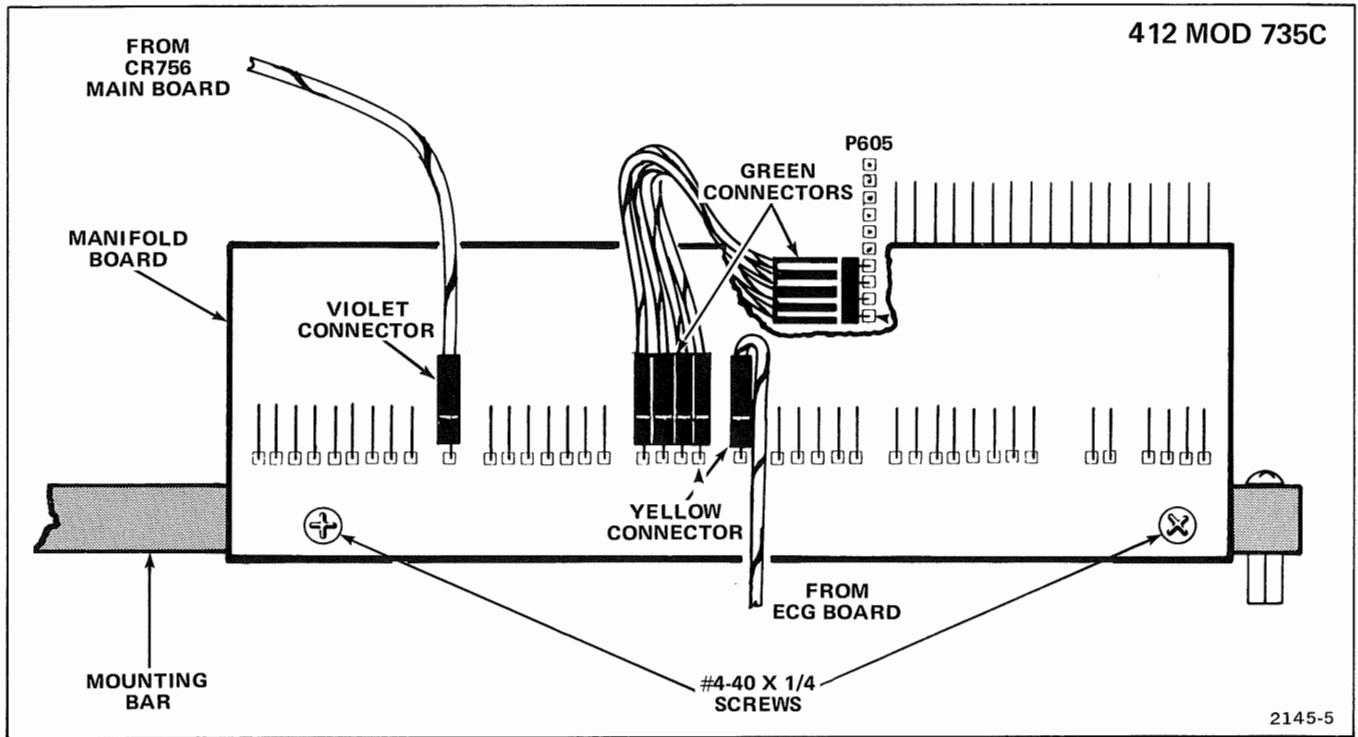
Installing Manifold Board and connecting cables in 412 735C.
